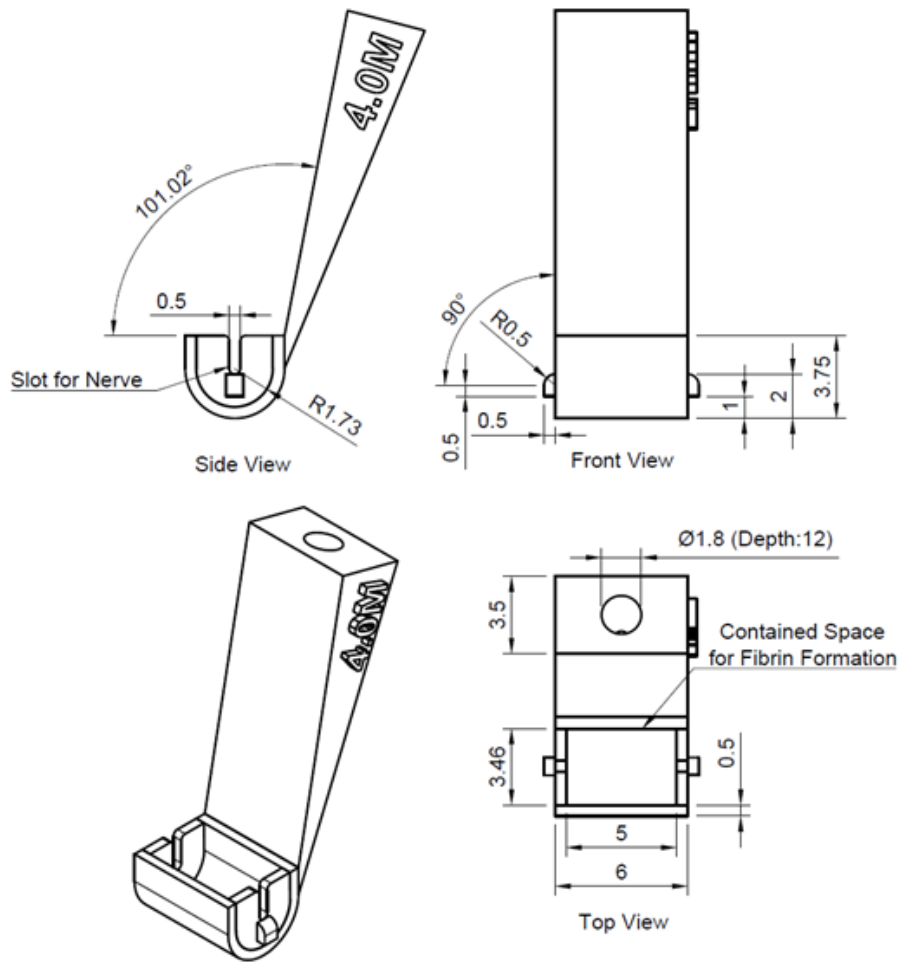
Design of the nerve-holder for the fibrin sealant approach. All dimensions are in millimeters (mm).
